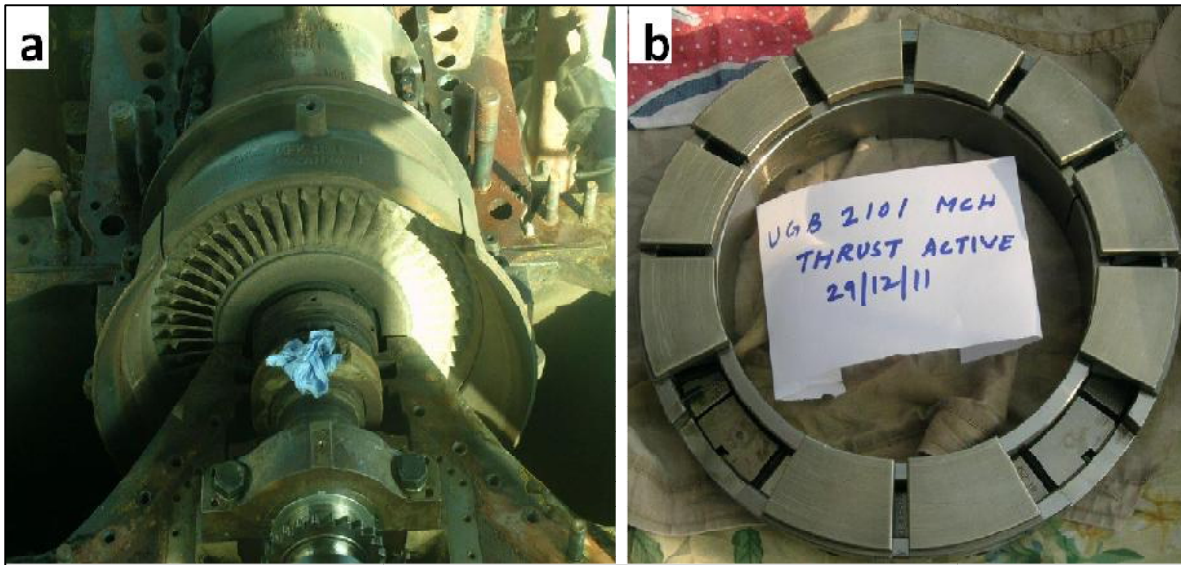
(a) Actual steam turbine machinery; (b) Thrust bearing
